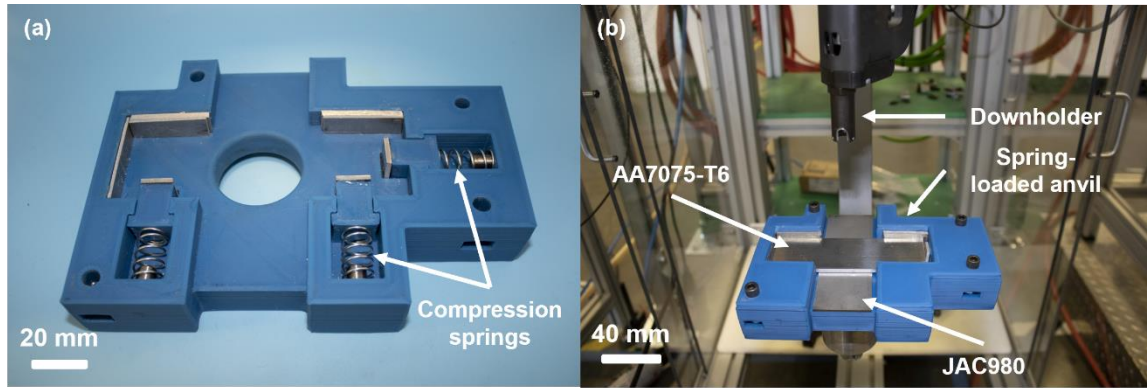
(a) 3D printed spring-loaded anvil (b) Experimental Setup
